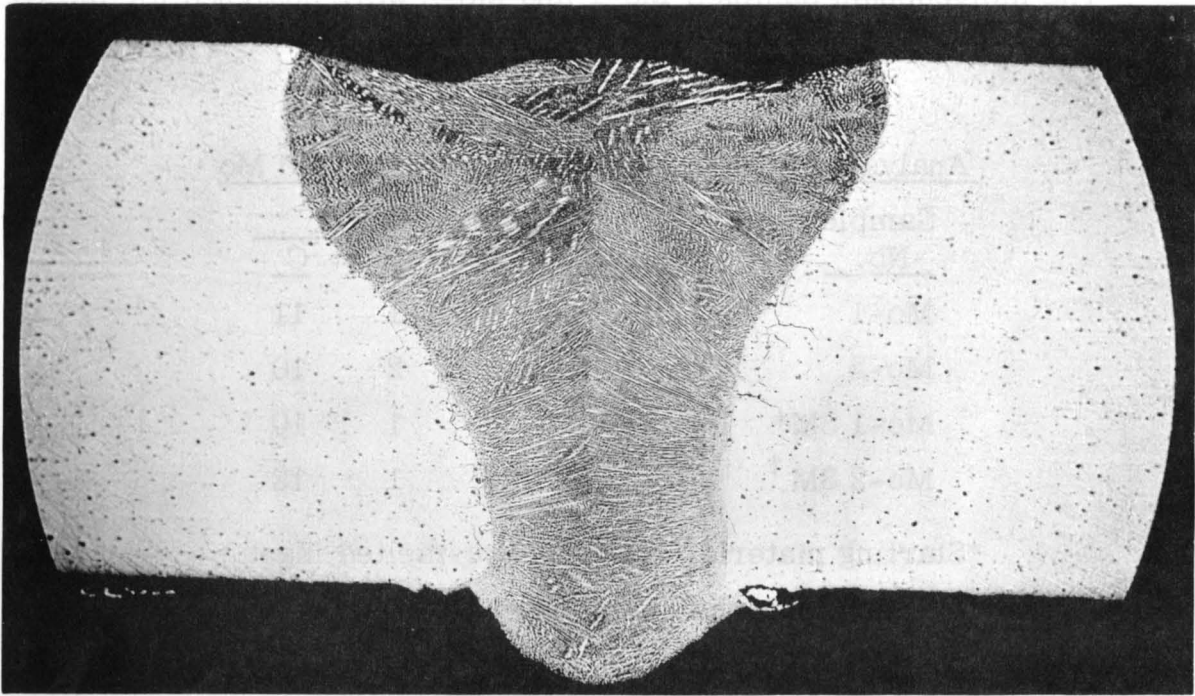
René 41 sheet--conventional E.B. weld.
